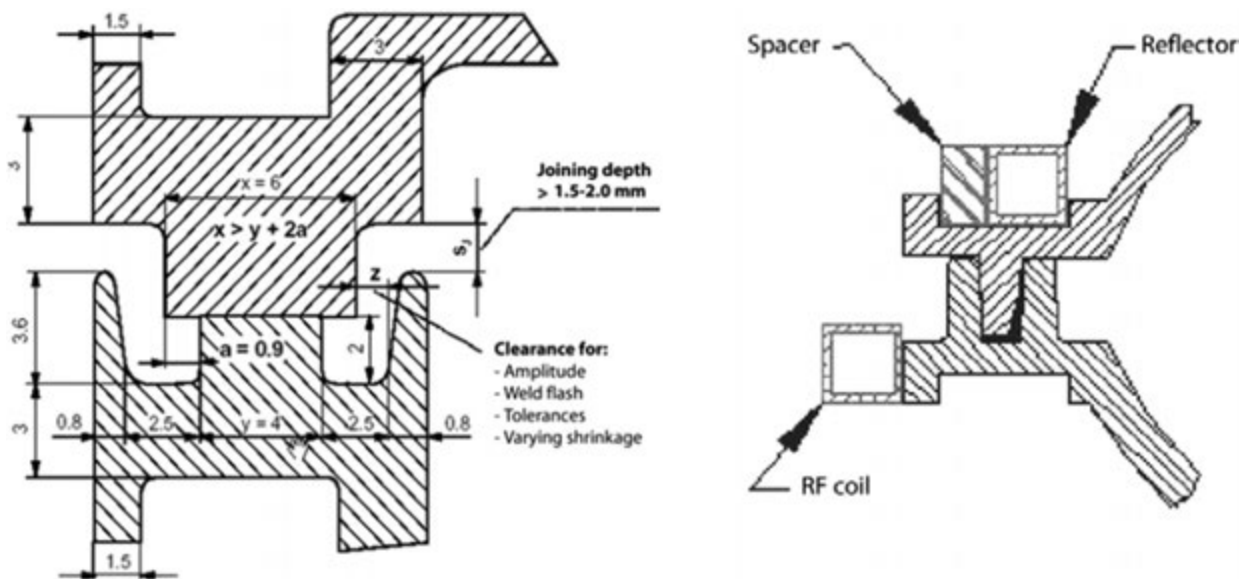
Schematic views of (linear vibration welding) butt-joint and (induction welding) tongue-in-groove joint. Reproduced from Kagan, V.A., Nichols, R.J., 2005. *Journal of Reinforced Plastics and Composites* 24 (13), 1345–1352.
